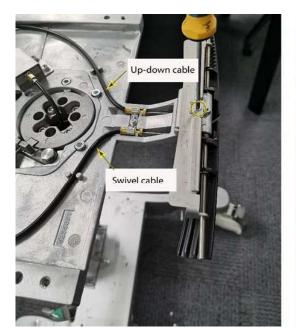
Protective Metal Plate Rotated 90 Degrees
